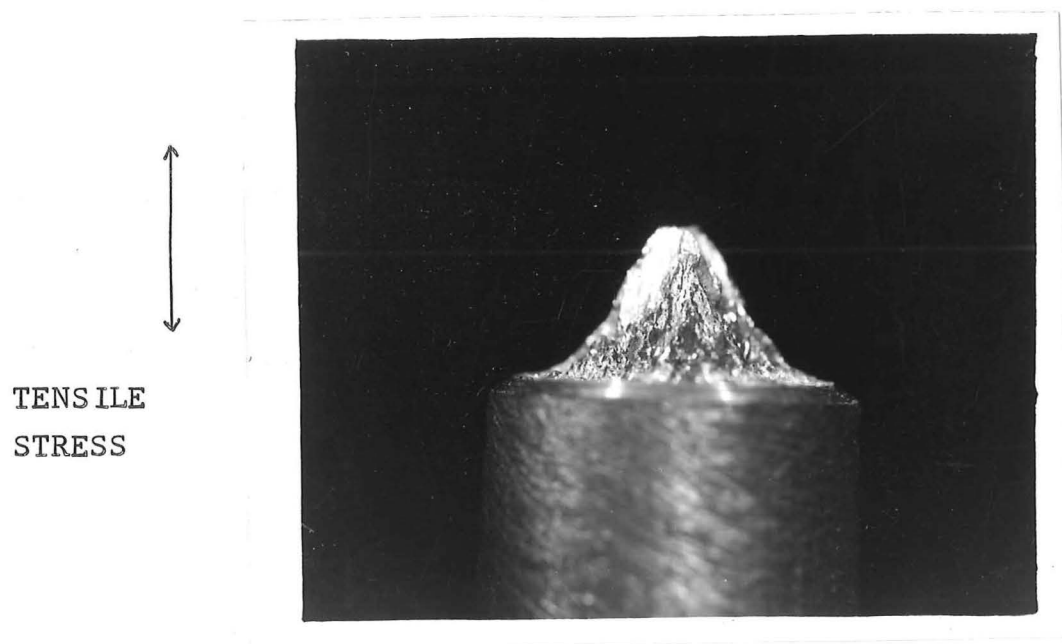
/23: Air fatigue fracture in notched direct stress specimen. Fracture starts in tensile mode but then changes to shear mode.
